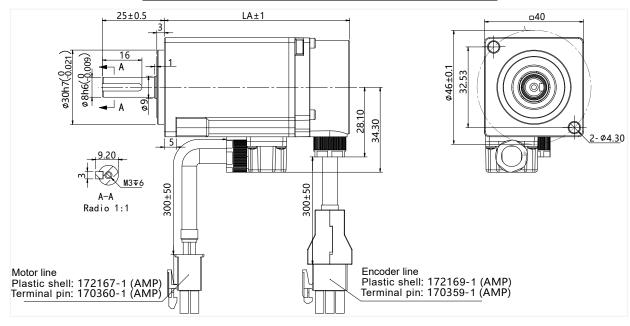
Installation dimension of WD series 40 flange servo motor
